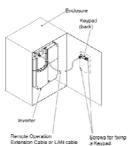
Mounting a Keypad on the Enclosure Wall
